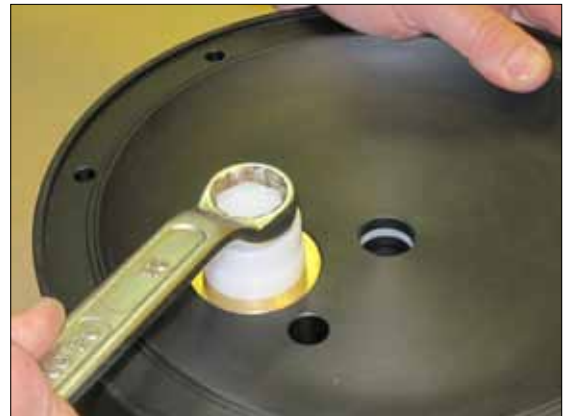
Tighten carefully by means of the mounting tool (pos 282) and a spanner.
